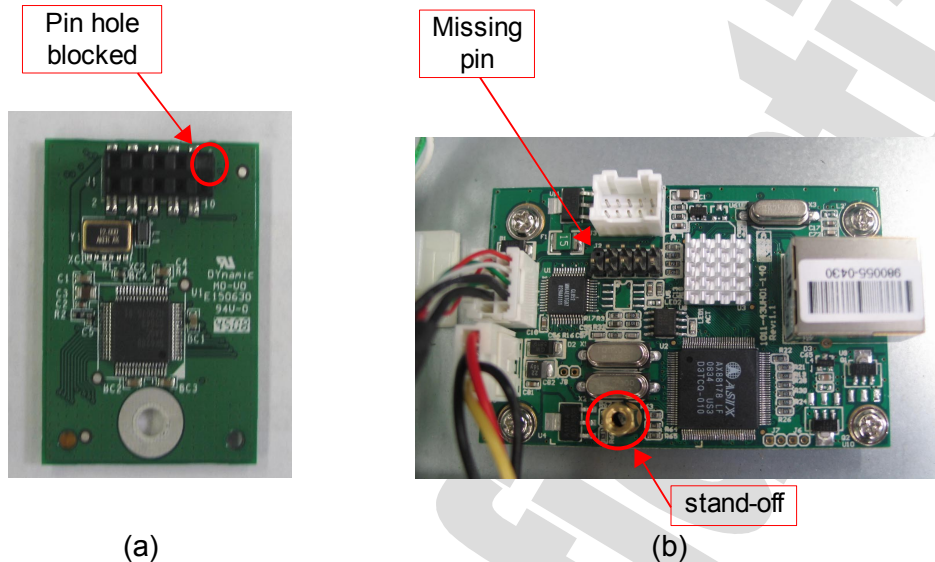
SSD Flash Pin Hole Blocked – Card's Connector Missing Pin
